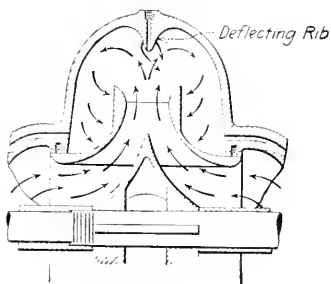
SHOWING SPECIAL FEATURES OF IMPELLER DESIGN
